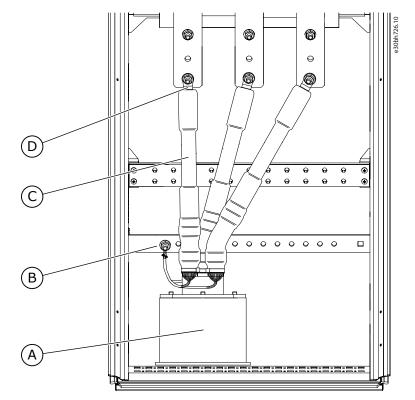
Example of a 3-phase Motor Cable Inlet to the Cabinet
